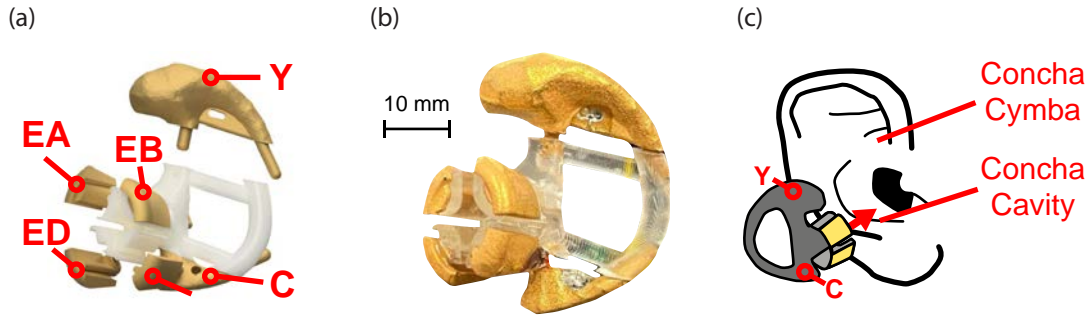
Photograph examples of 3D printed and plated earpieces
